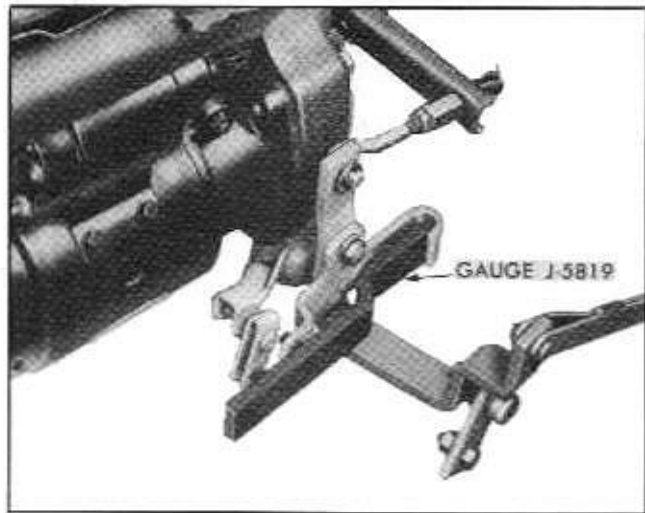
C-5 Gauge in Place to Adjust Overcenter Spring Lever
